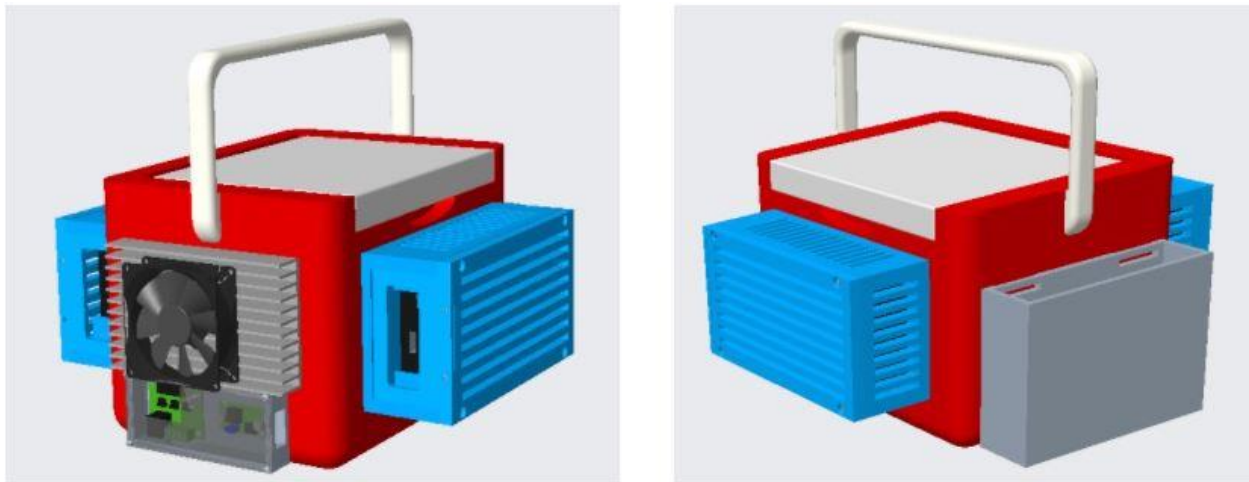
Assembled Cooler (left image: front left view; right image, front right view)
